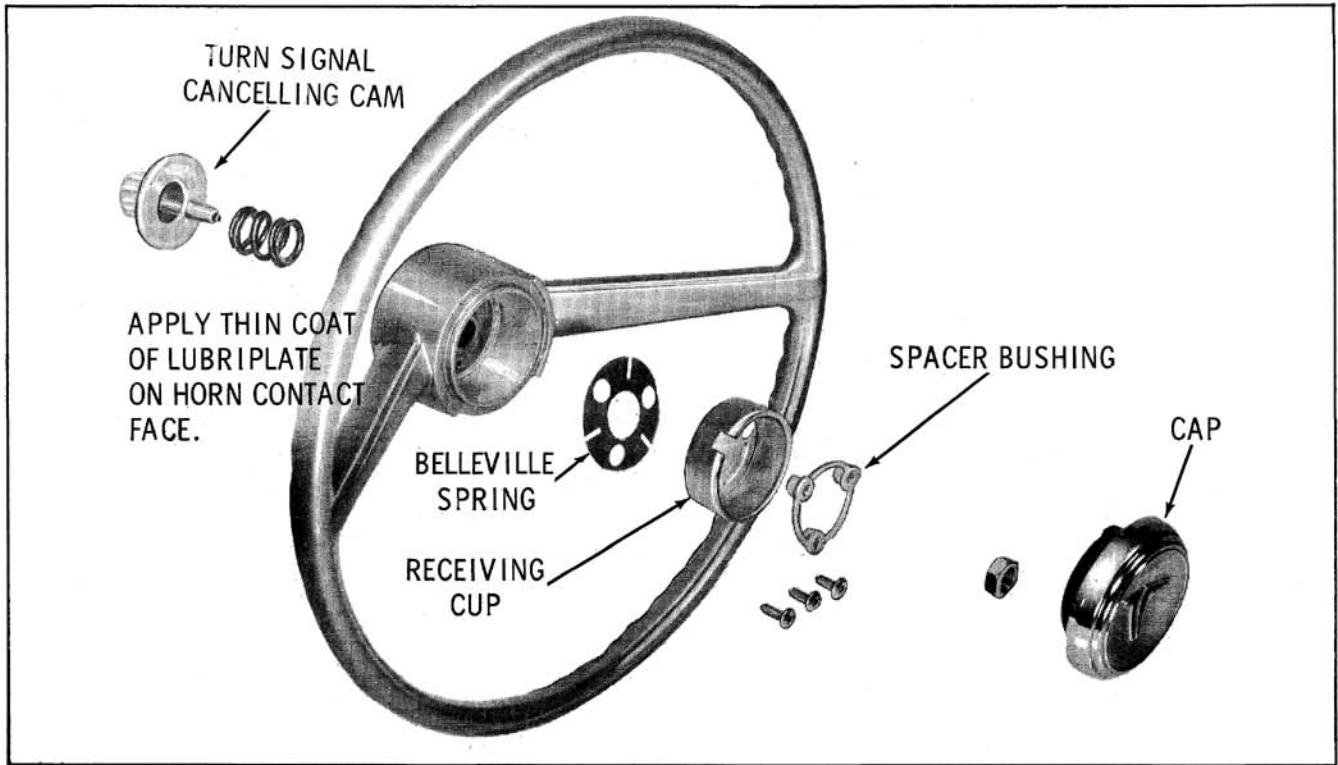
Standard Steering Wheel (Typical All Series)
